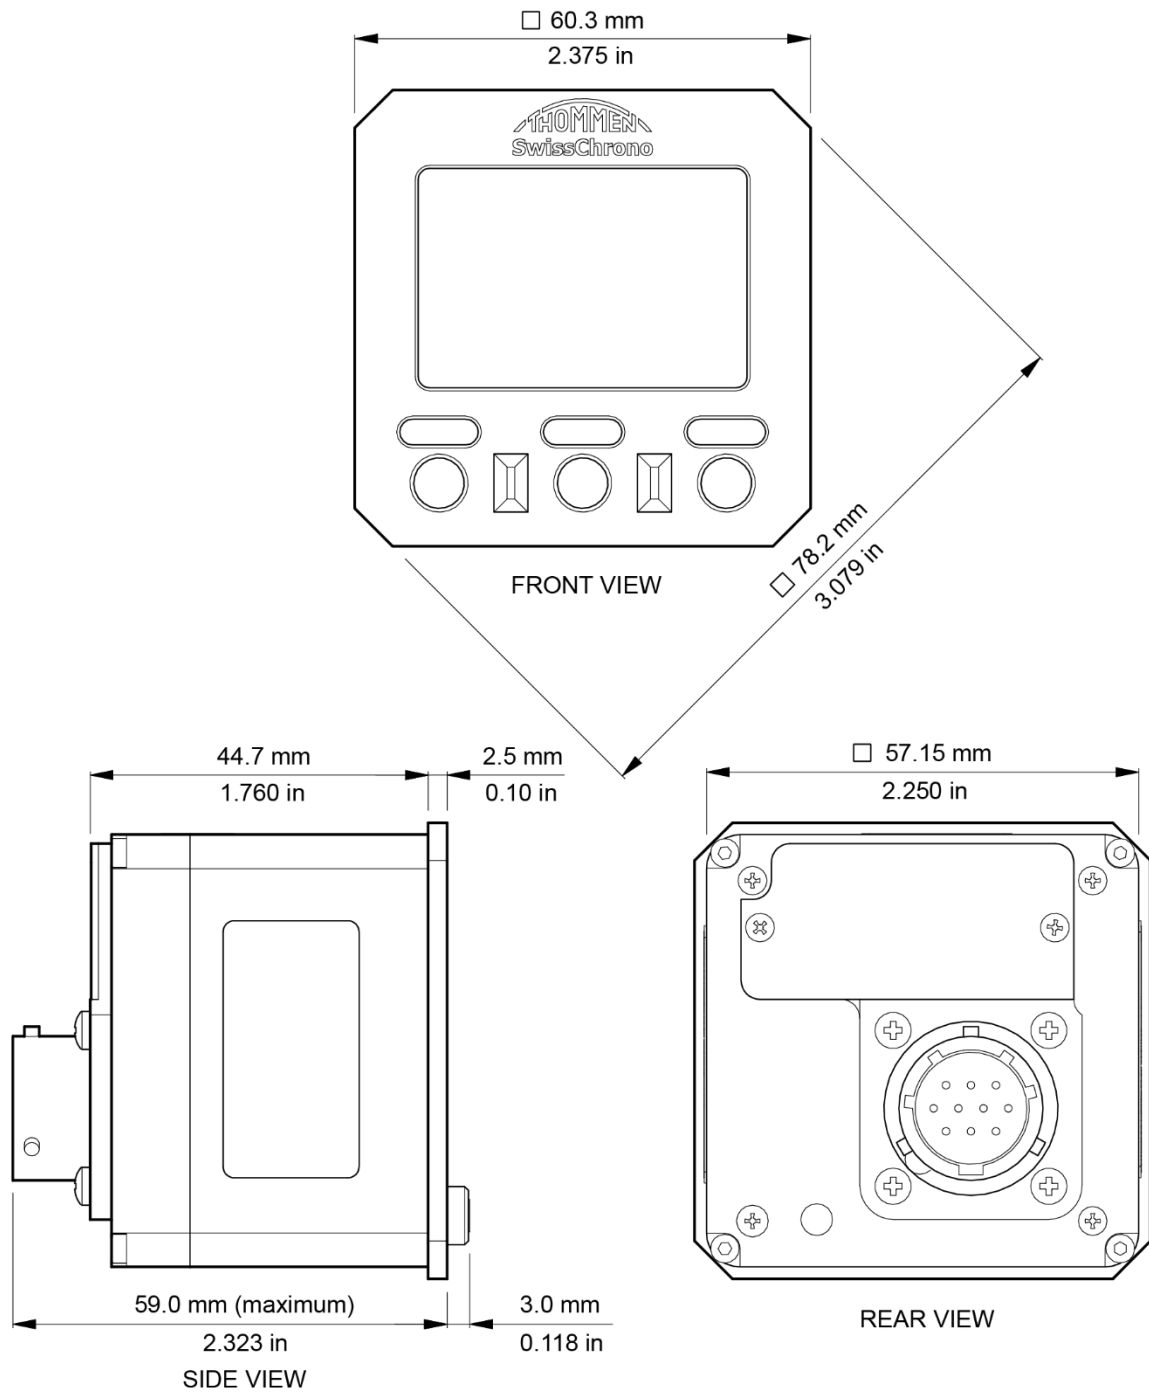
CM20 Digital Chronometer – Physical Dimensions
